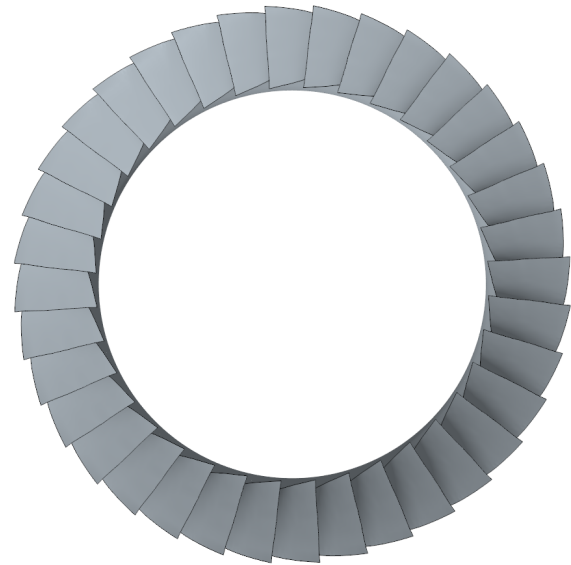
Front view of the NASA Rotor 37 CFD rotor
